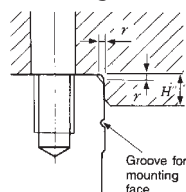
Ball Slide Datum Face Mounting Part
